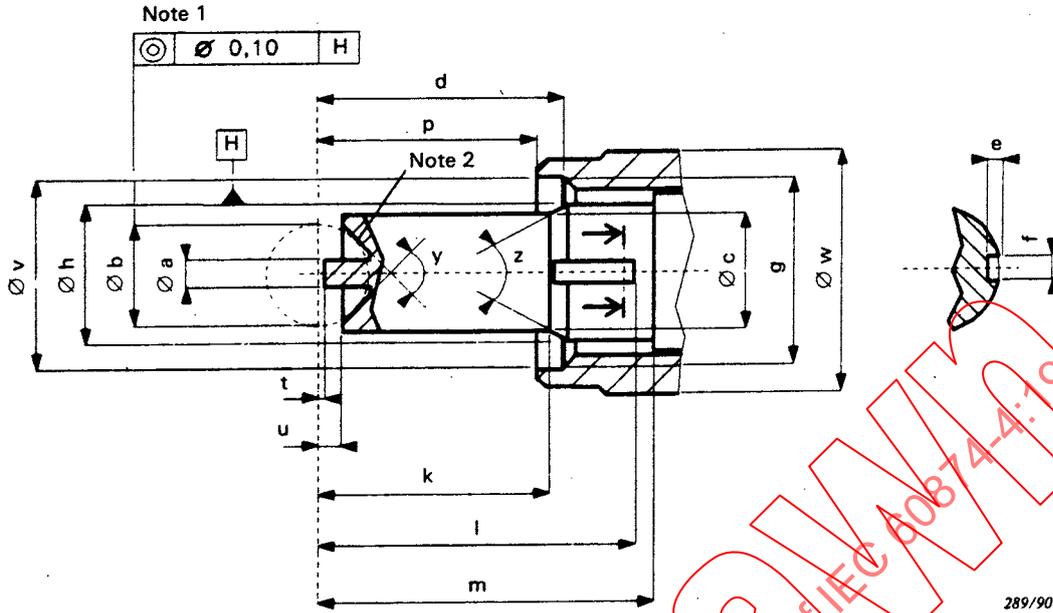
Plug interface drawing (for dimensions and notes see table 1)
